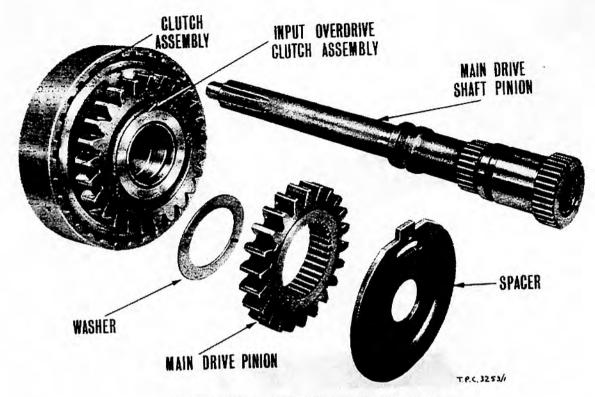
INPUT SHAFT AND CLUTCH ASSEMBLY
